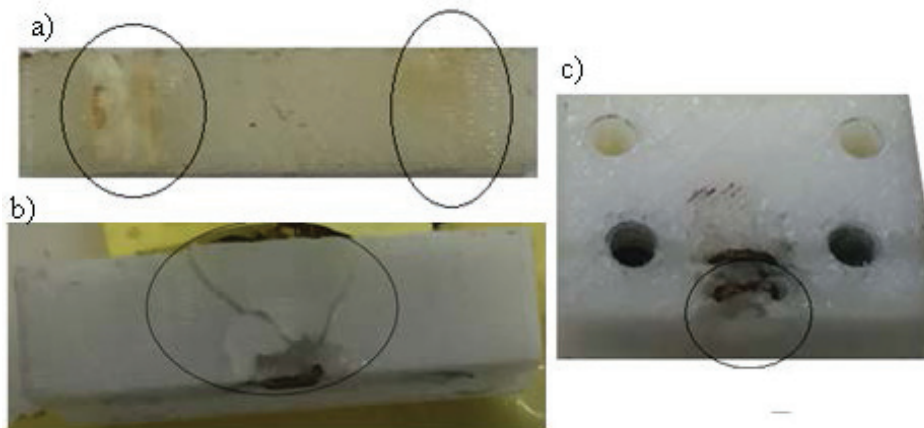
Fracture zones (circle) are observed in the grips after conducting 10 tests. a) Side view of covering plate with circle indicating fracture zone. b) Side view of base plate with fracture zone. c) Top side view of base plate, circle indicates fracture zone.
